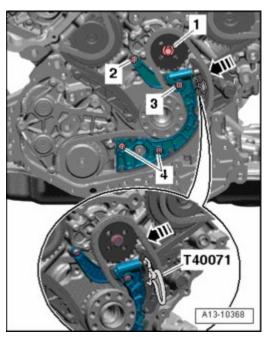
Pressing Tensioning Rail, Securing Chain Tensioner With Locking Pin T40071, Removing Bolts, Balance Shaft Chain Sprocket & Chain Tensioner
